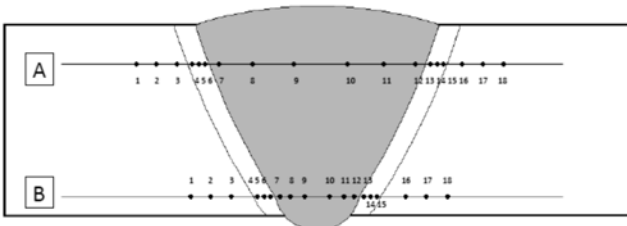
Welded joint – butt weld in 20x200x220 mm plates
